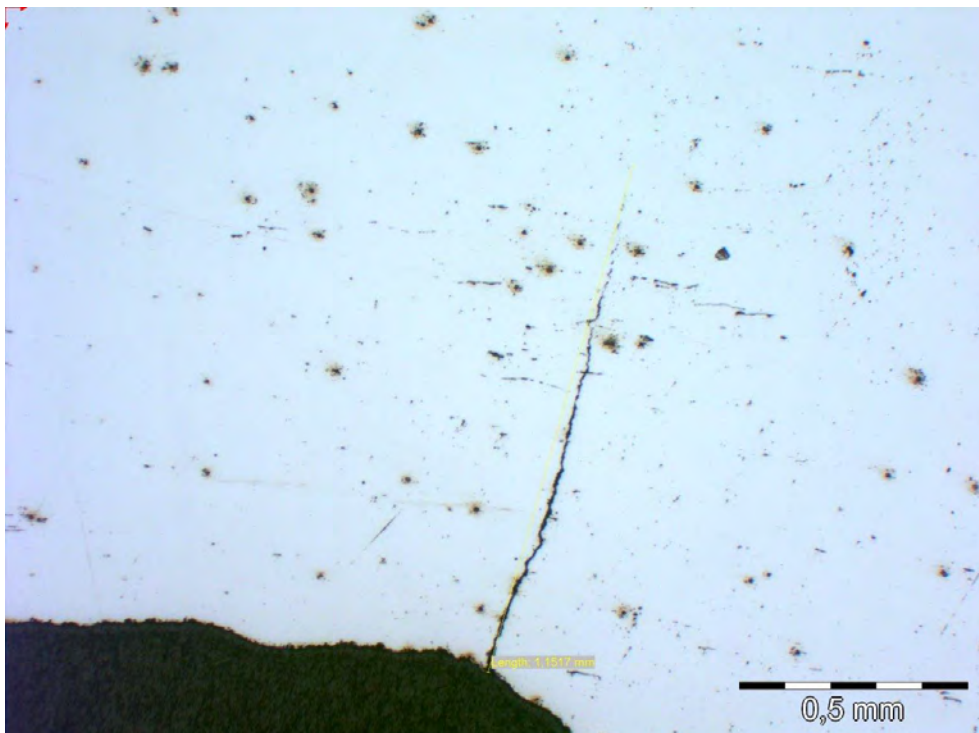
Cut two in crack at segment B, first ridge on barrel no. SFK 0120-A
